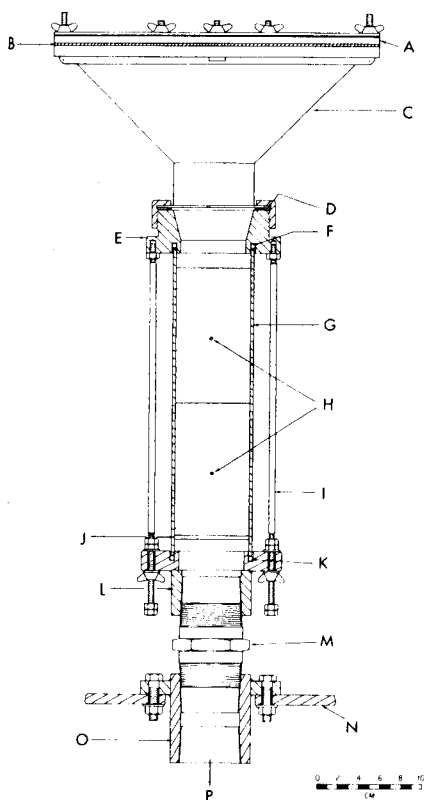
High-volume air sampler: (A) glass-fiber filter frame; (B) silicone rubber gasket; (C) filter frame holder; (D) silicone rubber gasket; (E) top adaptor; (F) silicone rubber O-ring; (G) PUF-plug cartridge; (H) PUF-plug; (I) tie-rod; (J) perforated aluminum disc; (K) silicone rubber O-ring; (L) bottom adaptor; (M) check valve; (N) mounting plate in bottom of sampler shelter; (O) mounting adaptor; (P) air-flow through ducting to pump.
